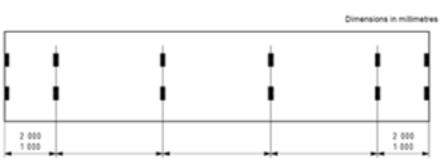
1AA, 1A or 1AX containers without gooseneck tunnel — Minimum requirements
